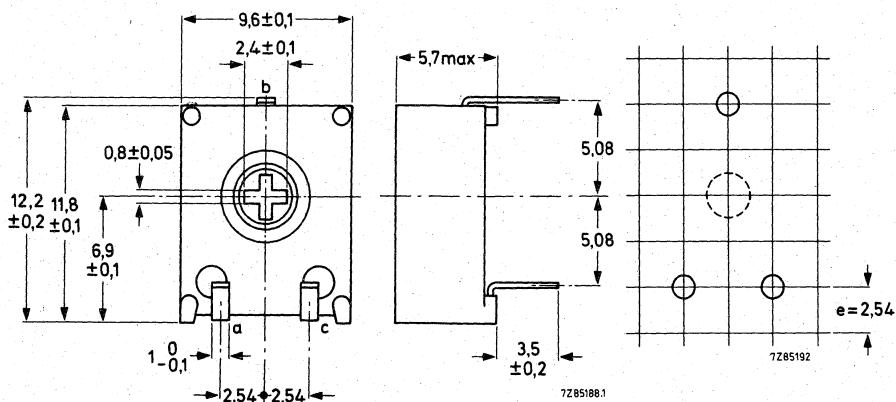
Horizontal mounting, version with cross-shaped recess (non-insulated hot wiper, b).
